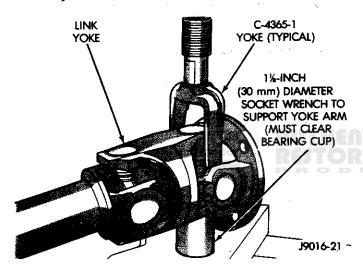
Bearing Cap Removal With Tool C-4365-1
